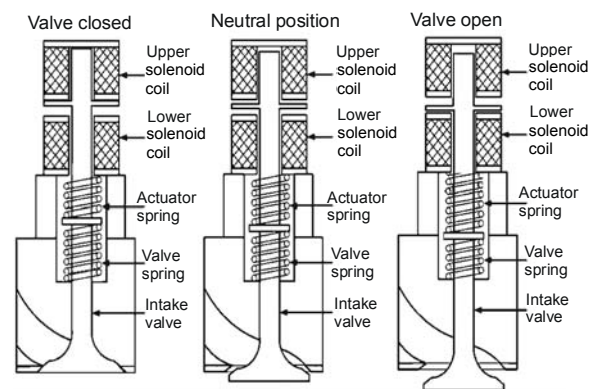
Electro-mechanic valve actuator (EMVA) system
